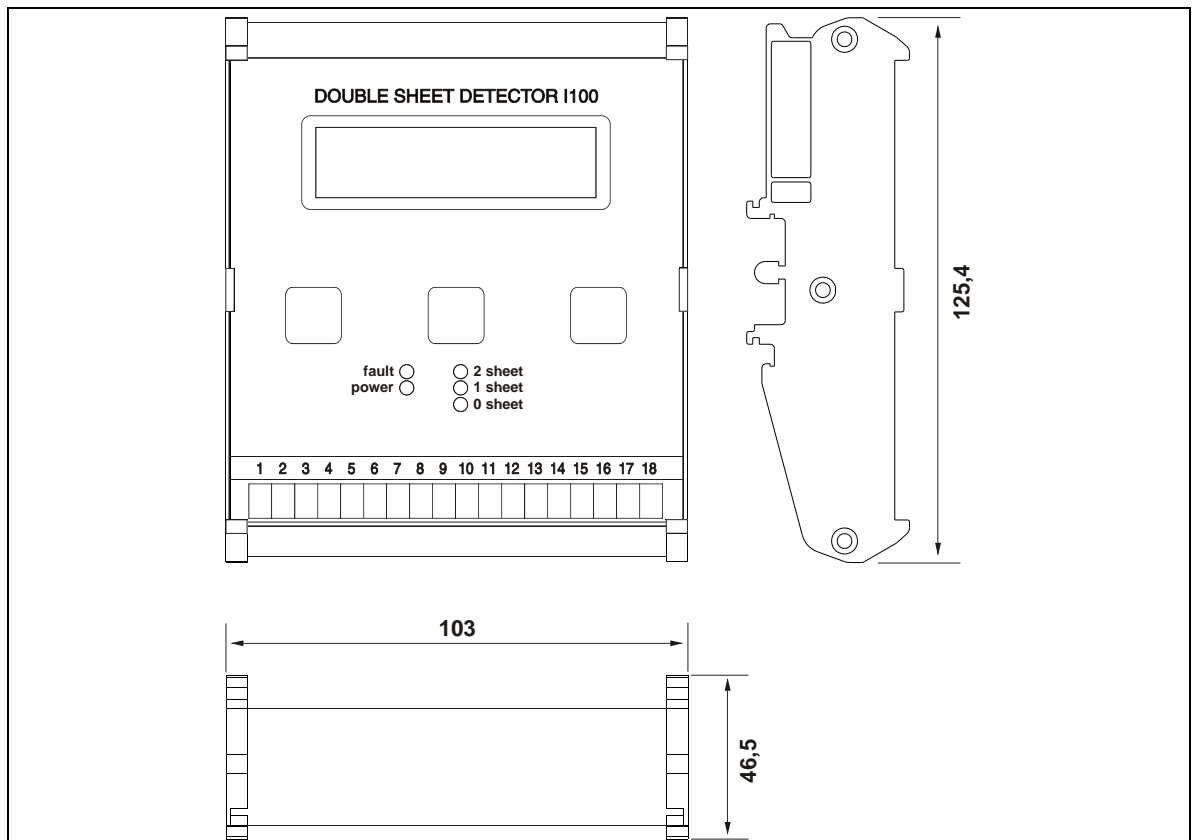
Dimensions of I100 (for mounting on DIN-rail)
